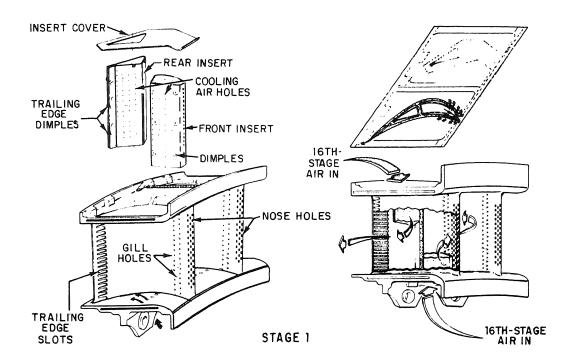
First-stage gas generator turbine nozzle cooling.
